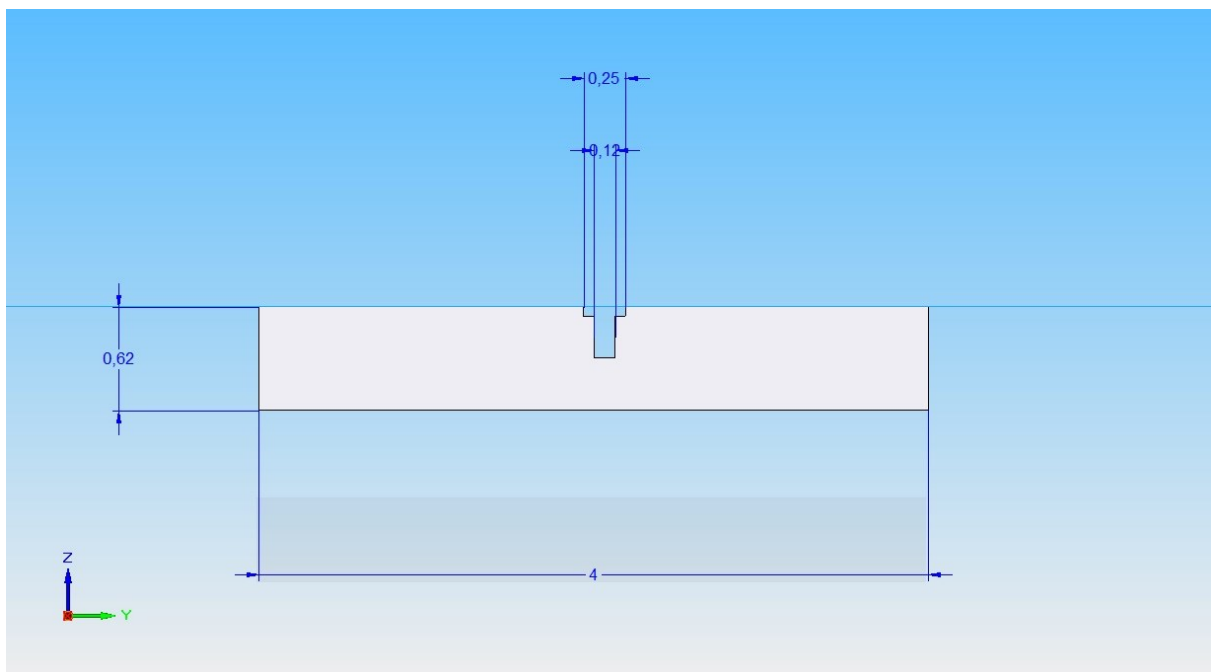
7 Back view of waveguide sensor carrier (Part 2)
